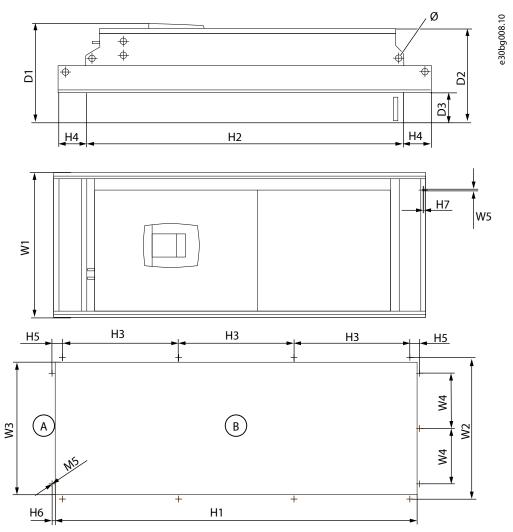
Dimensions of the VACON® NXS/NXP AC Drive, FR9
